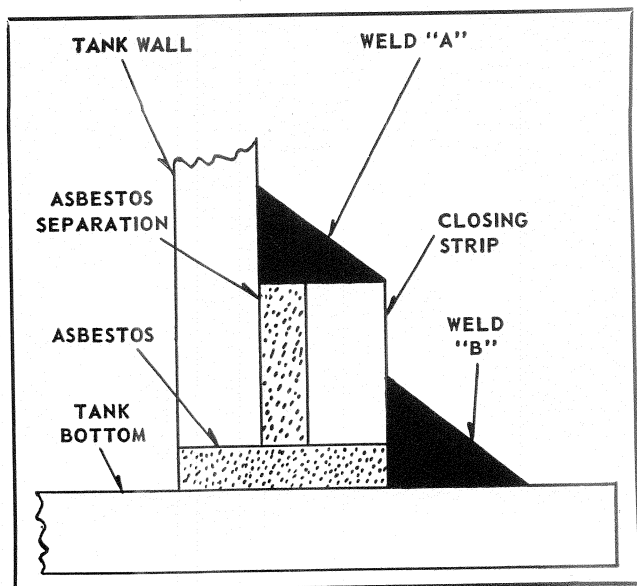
Weld between Tank Wall and Tank Bottom
